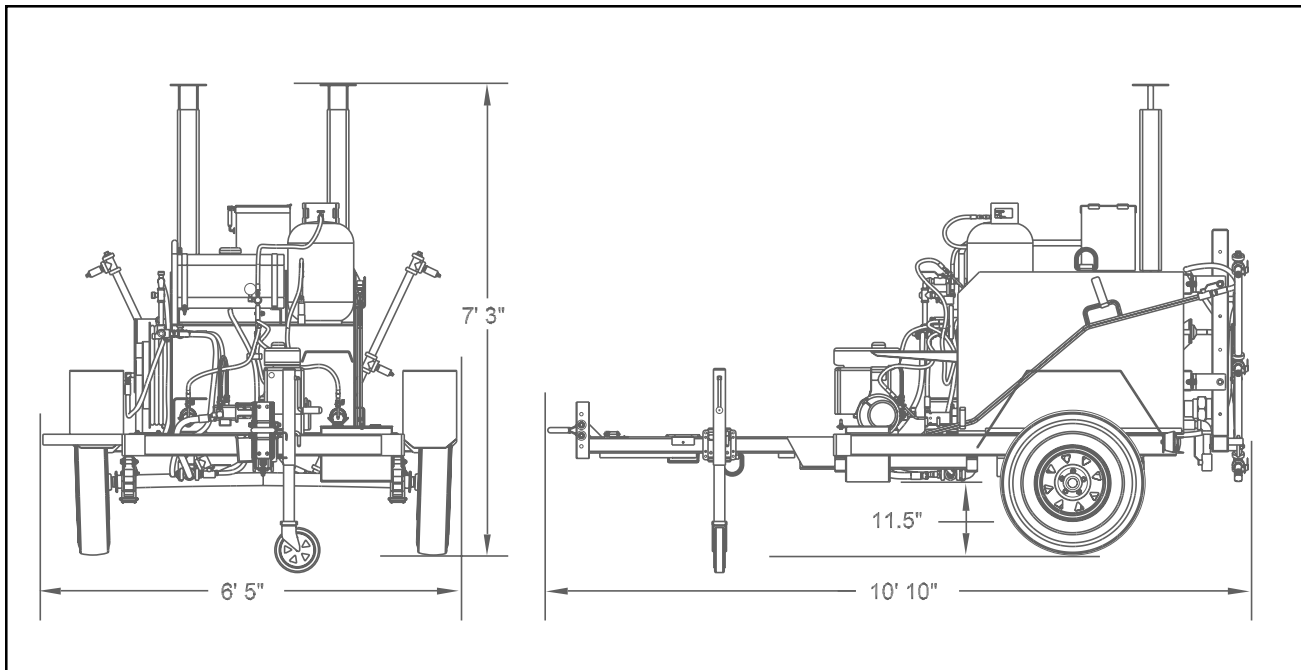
OUTLINE DIMENSIONAL DRAWING - L150T
